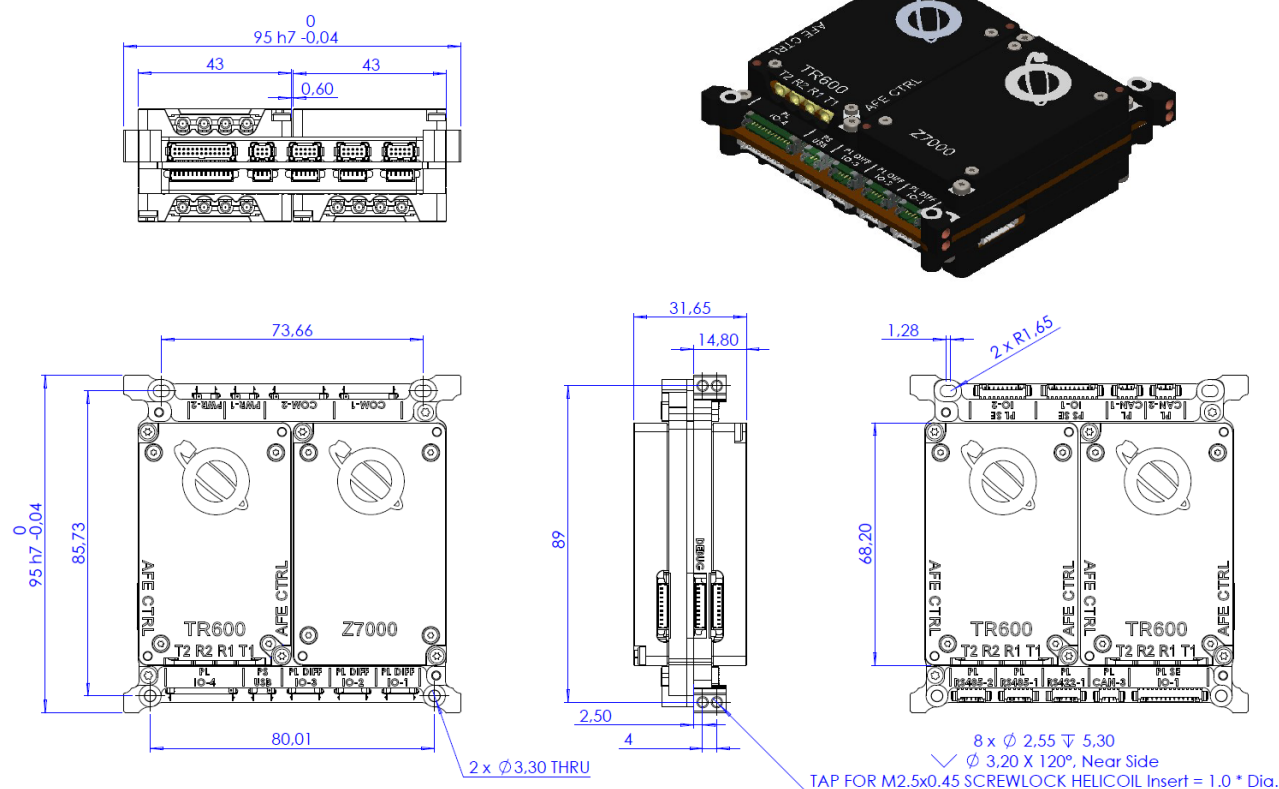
NanoCom SDR MK3 with 3xTR600 mechanical drawing (all dimensions are in mm)
